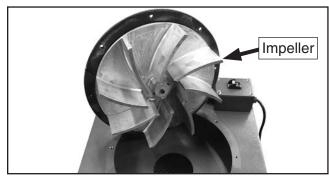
Motor/impeller assembly removed for cleaning and inspection.
